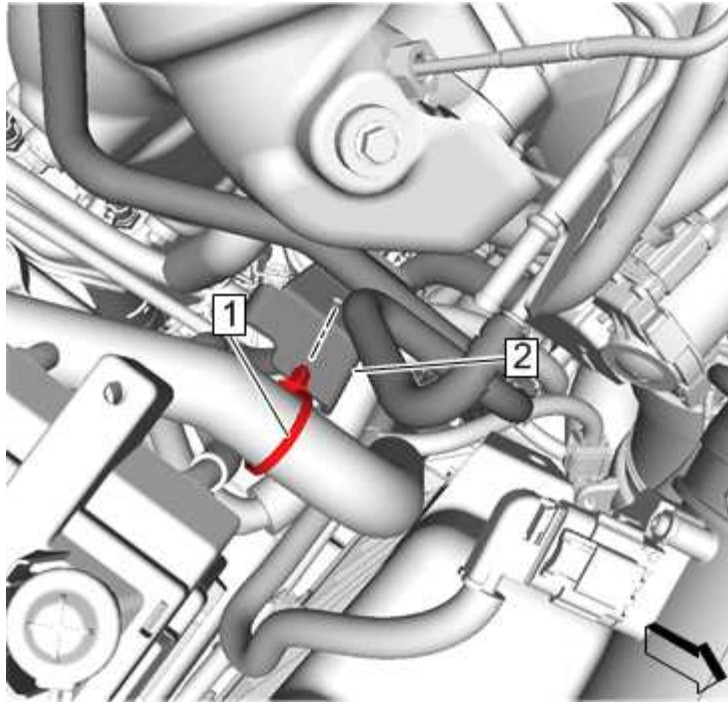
Radiator Outlet Hose Clip And Heater Outlet Pipe
